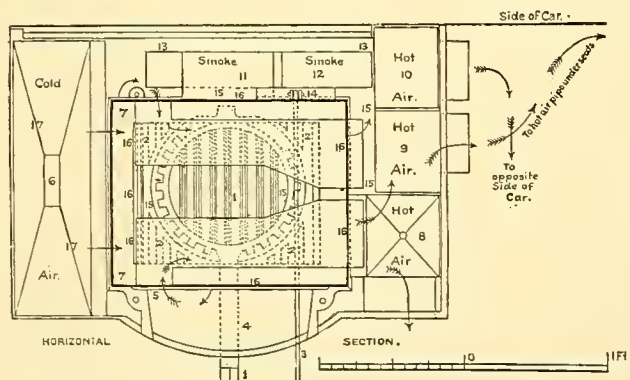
Section through Upper Damper-rod, showing ground plan.
